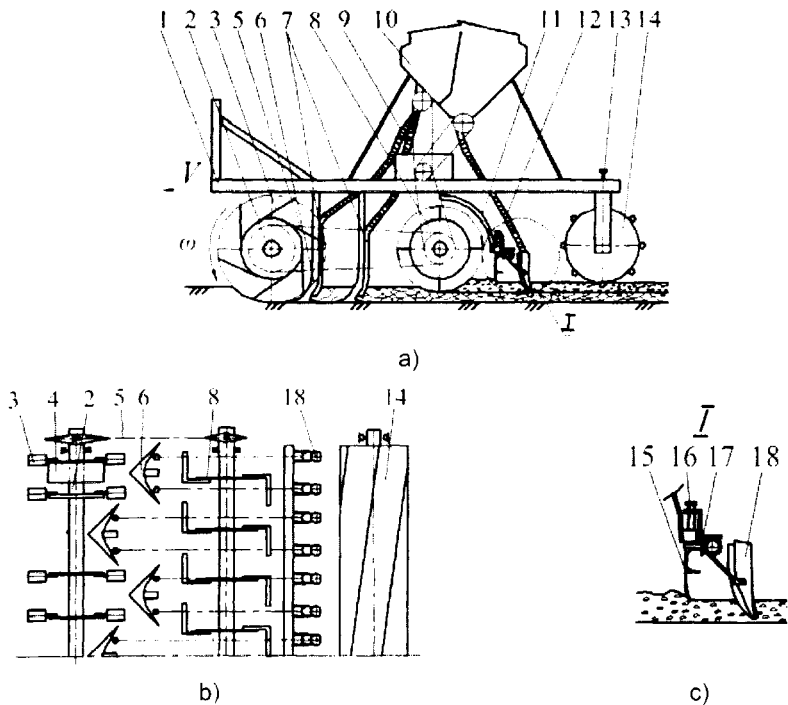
Combined tillage tool KPA-2.2 for plow-less soil tillage: a) side view, b) top view; assembly units: 1 – supporting wheel, 2 – mounting system, 3 – work depth control, 4 – main frame, 5 – subsoiler's shares, 6 – disk harrow section, 7 – mechanism of disc harrow depth control, 8 – scraper
